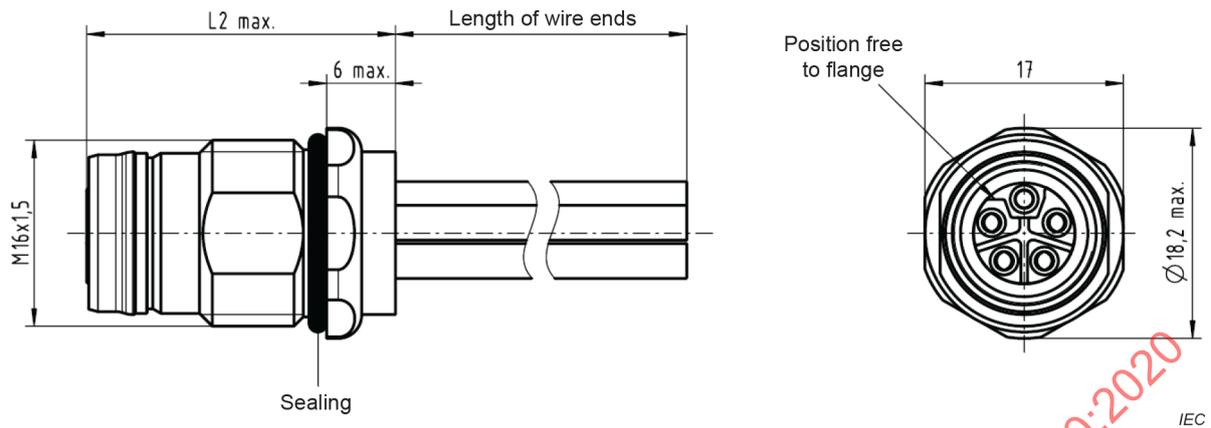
Fixed connector, female contacts, mounting with thread M12 × 1 and outer push-pull locking, with wire ends, single hole rear mounting thread M16 × 1,5
